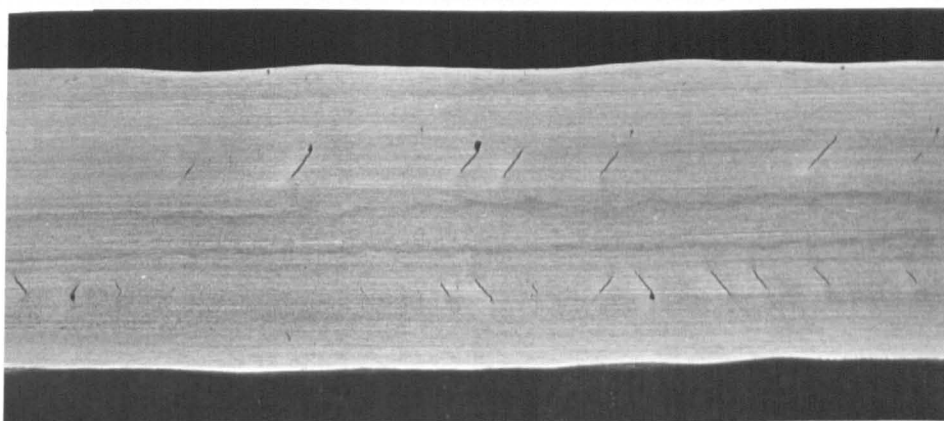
Sectioning of weld metal specimens to prepare fracture surfaces to be examined in the scanning electron microscope.
